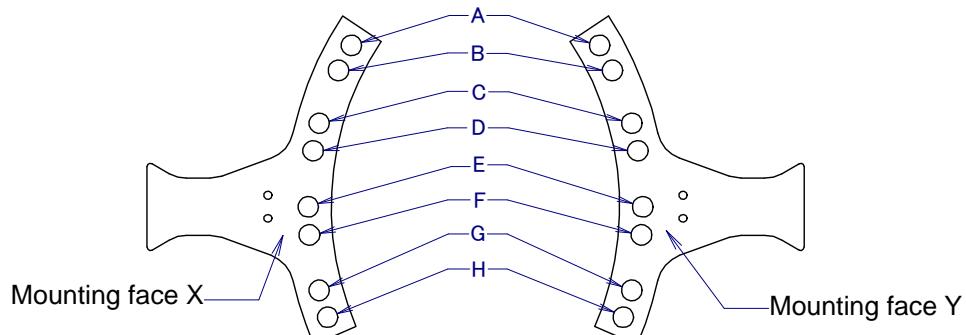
(e) Mounting the J1-axis adjustable mechanical stopper (1/3)
